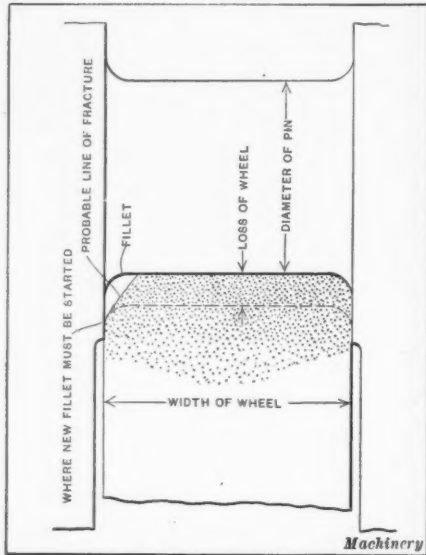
Effect of breaking off Fillet in causing Rapid Waste of Wheel
